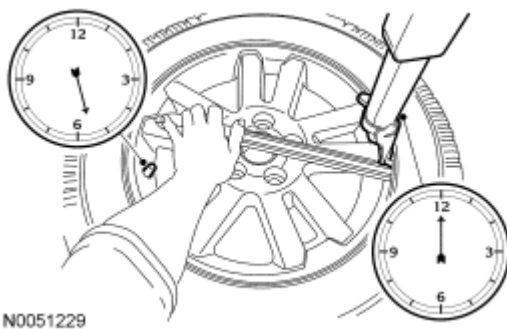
Identifying Wheel And Tire Assembly On Turntable Tire Machine (Dismounting Outer Bead)
